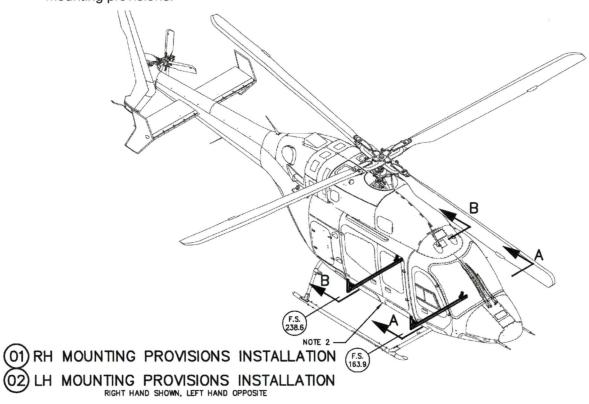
Cargo Basket Mounting Provisions Installation (Right hand or left hand, not both)
